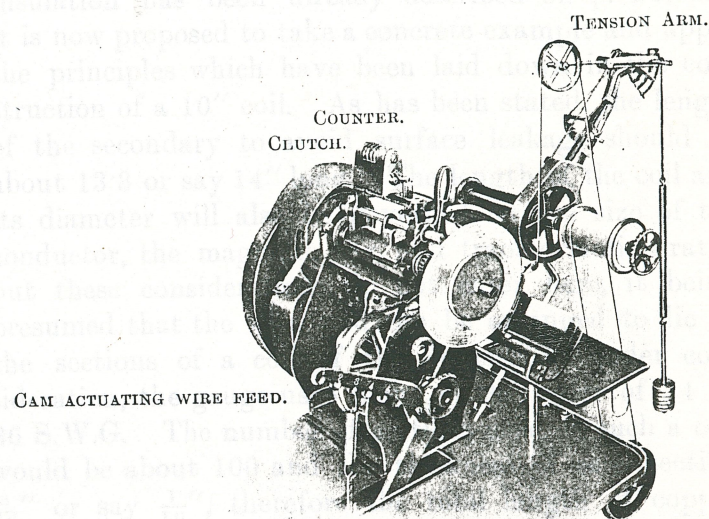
Universal winding machine, with wire feed and its cam, bottom spindle with brake wheel, and revolution counter (on top), also weighted tension arm.
